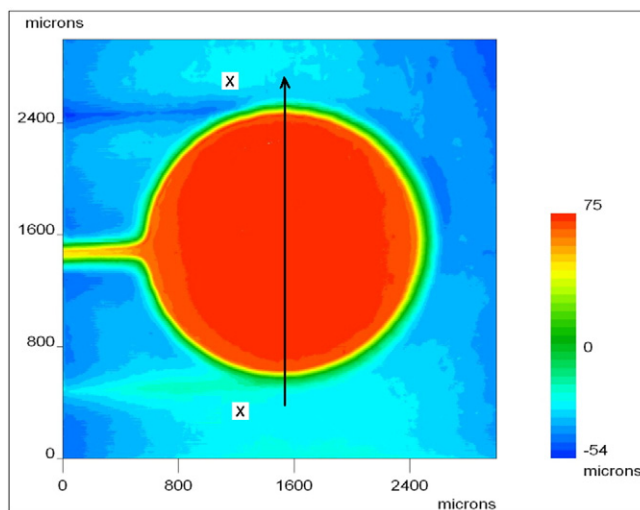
3D topographic imprints of the elastomeric die cavity mould realised by casting (unit: μm).
